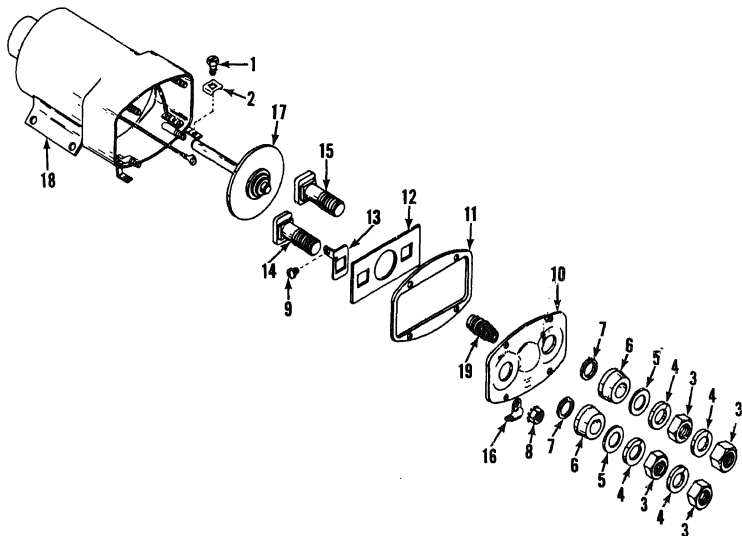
Solenoid, commutator end plate, and brush holder, exploded view.
